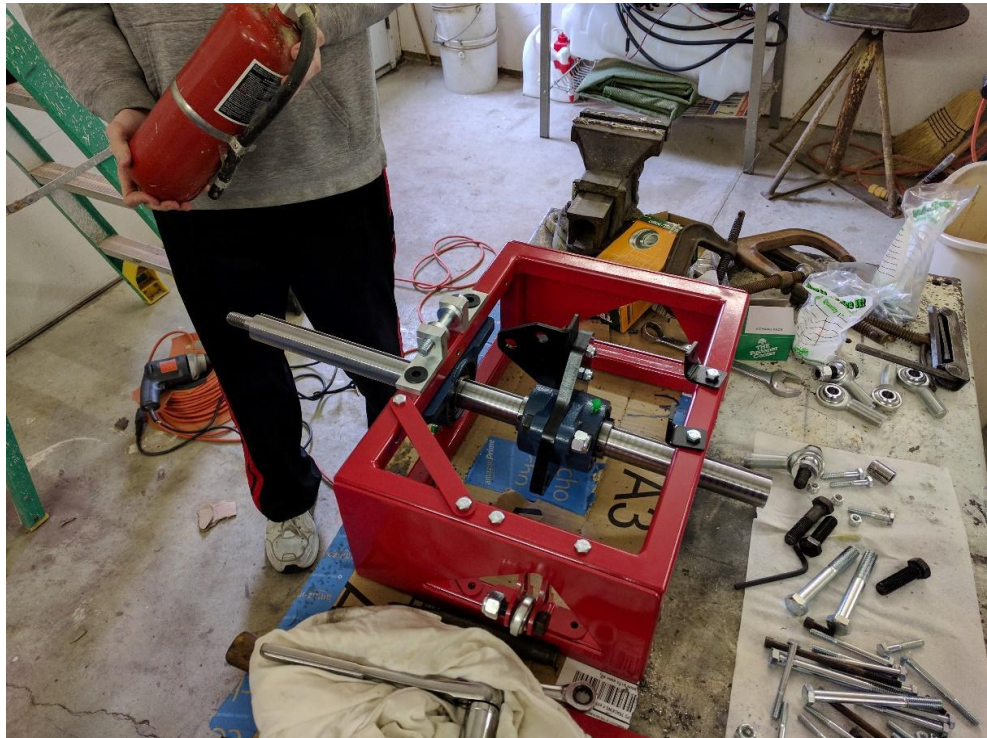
LC Cage with Shaft/Pillow Block Bearings
